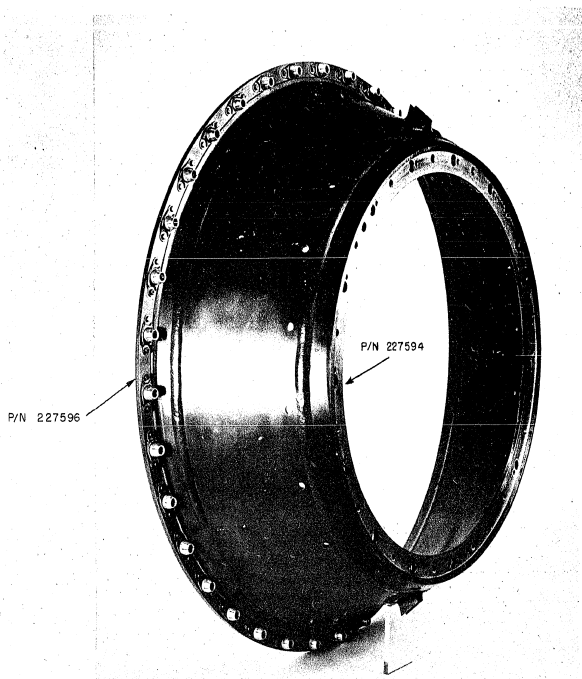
P/N 608569 - TURBINE STATOR BLADE SUPPORT ASSEMBLY.
